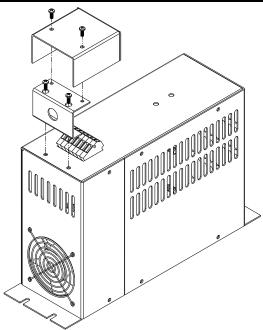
Conduit Cover Installation for M3 and M4 chassis
